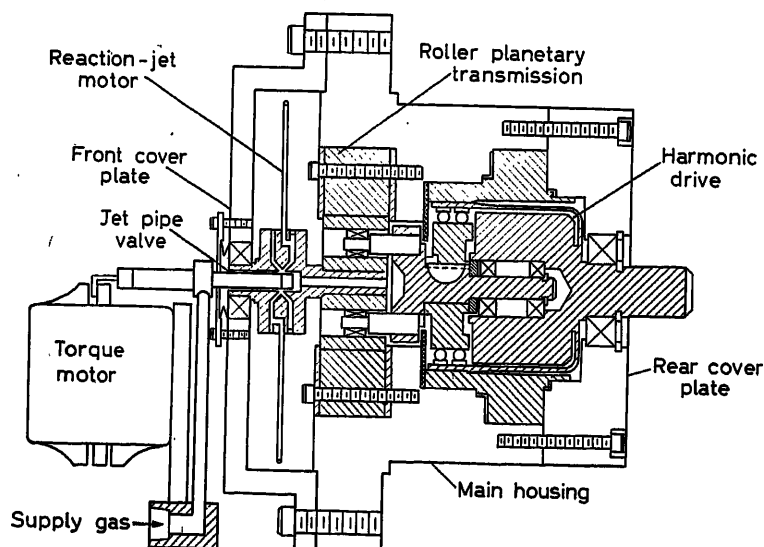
Assembly drawing of reaction-jet servomotor with jet pipe valve and reduction gearing
